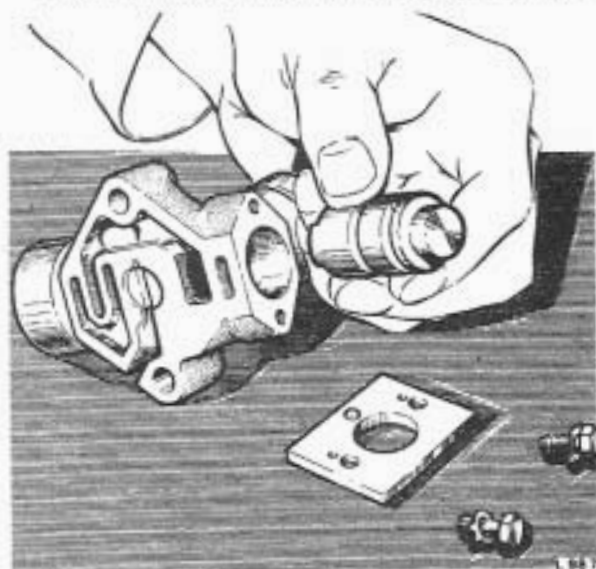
REMOVING THE REAR PUMP AND GOVERNOR
